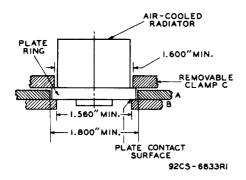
Mounting Arrangement for Use with Coaxial-Line or Cavity Circuits.
